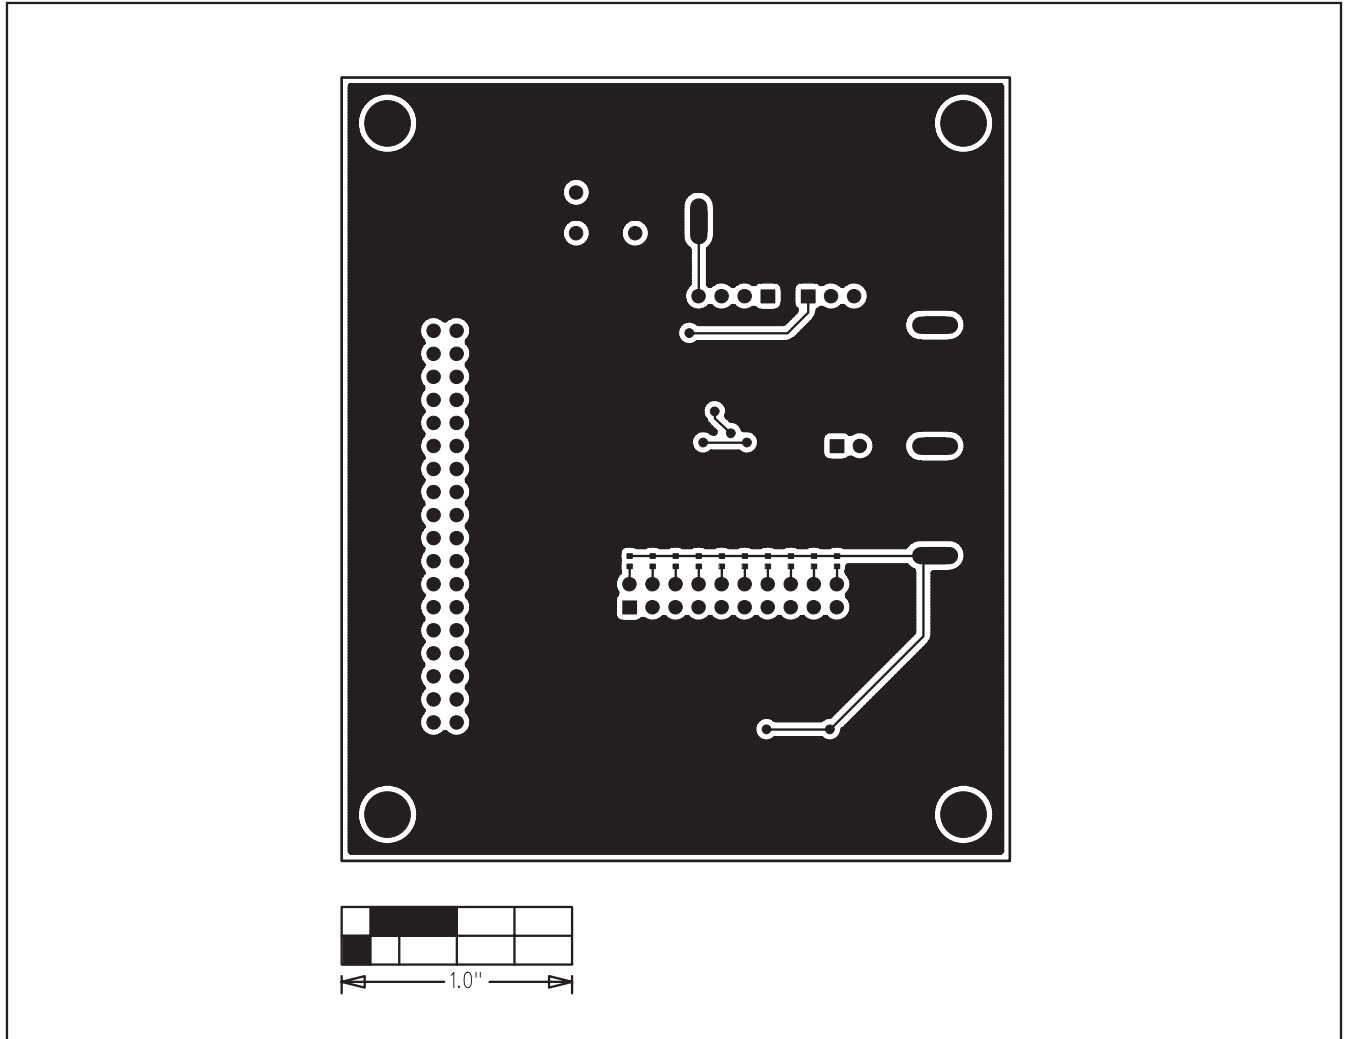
MAX6966 EV Kit PCB Layout—Solder Side
